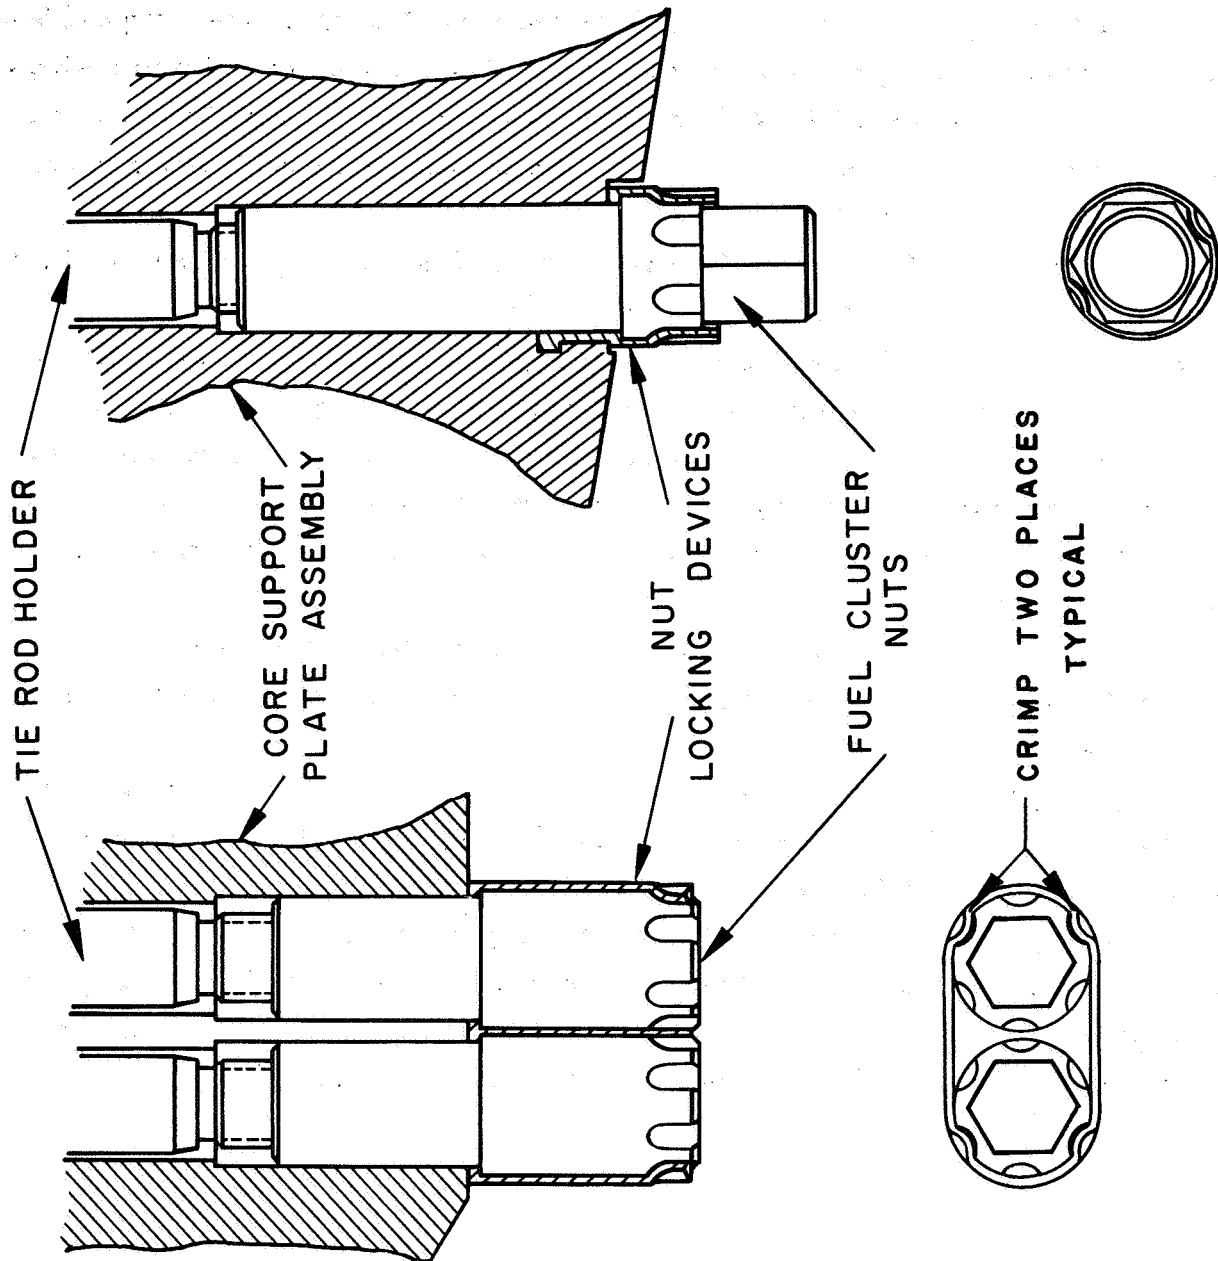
CLUSTER NUT LOCKING DEVICE
